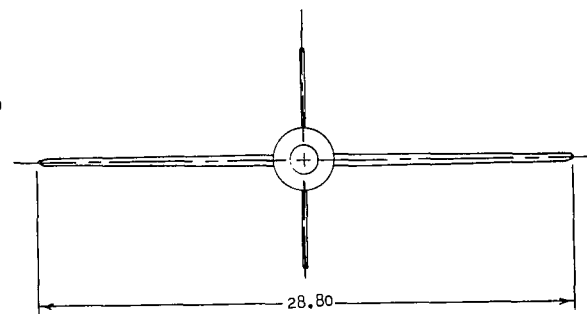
Details and dimensions of basic configuration (model A). All dimensions are in inches.
